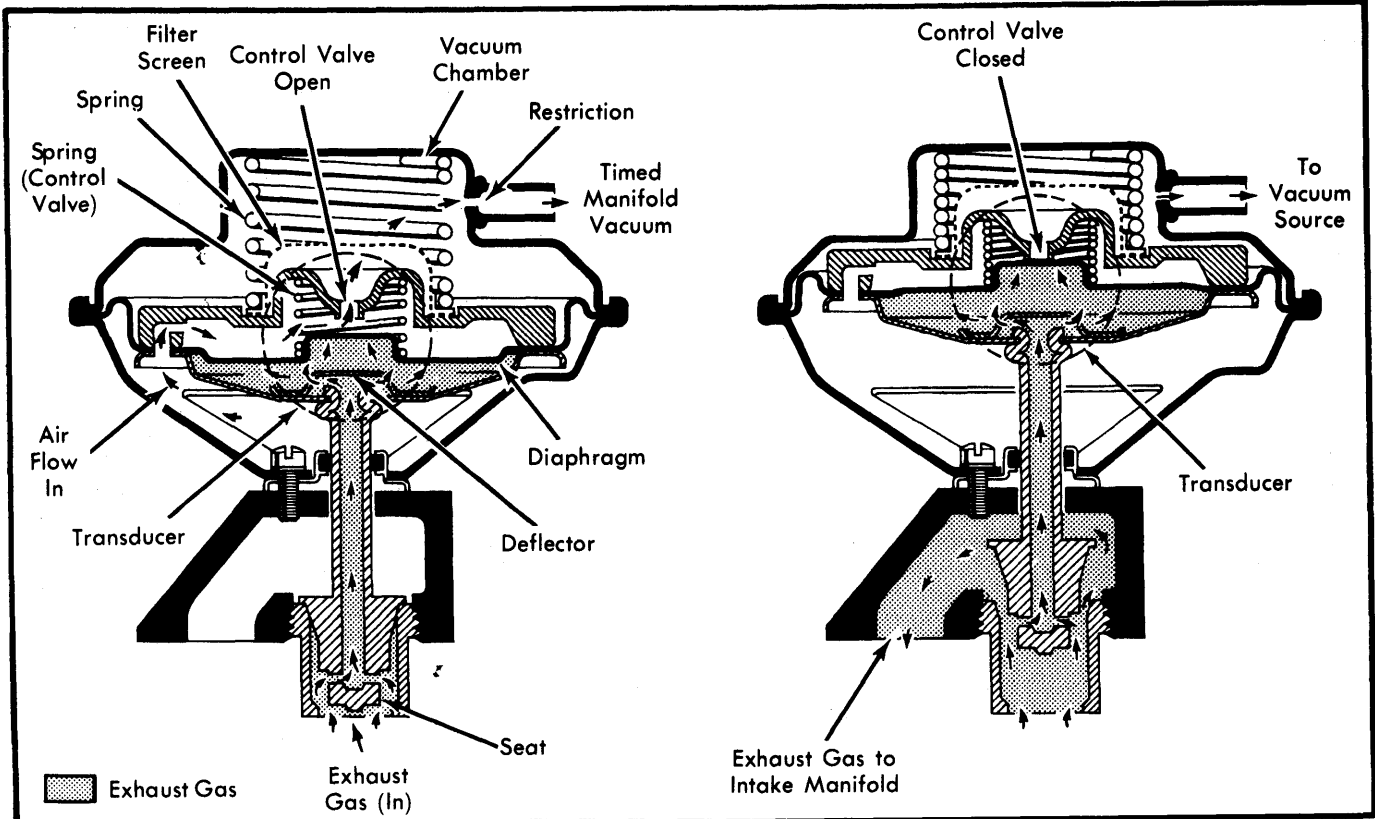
Cutaway View of Positive Back Pressure EGR Valve
